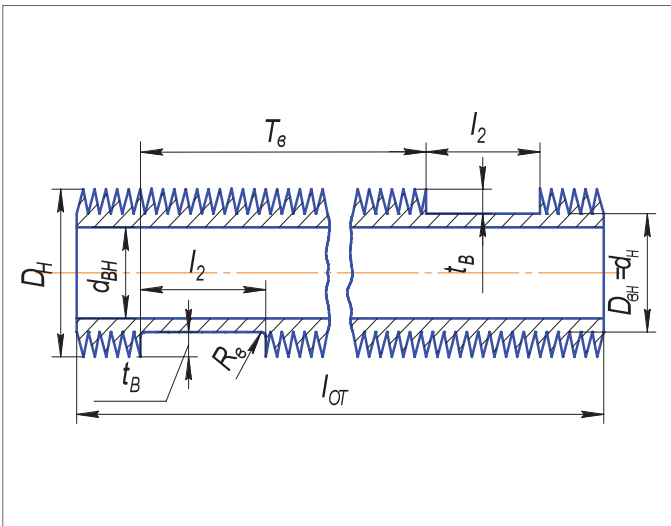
Diagram to calculate the depth of the cut edges of the section finned tube bending
